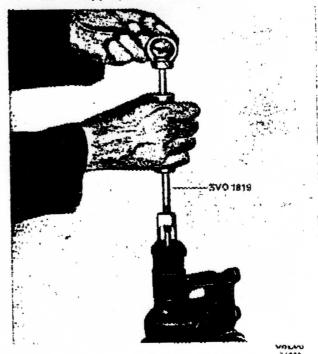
Removing pitman arm shaft bushing and scaling ring.
